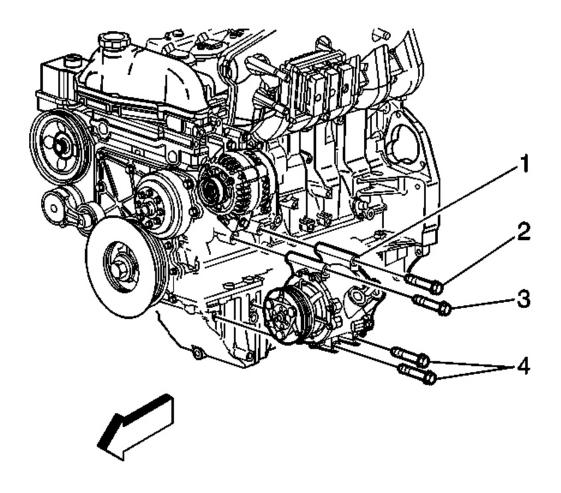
Removing/Installing Compressor Courtesy of GENERAL MOTORS CORP.
